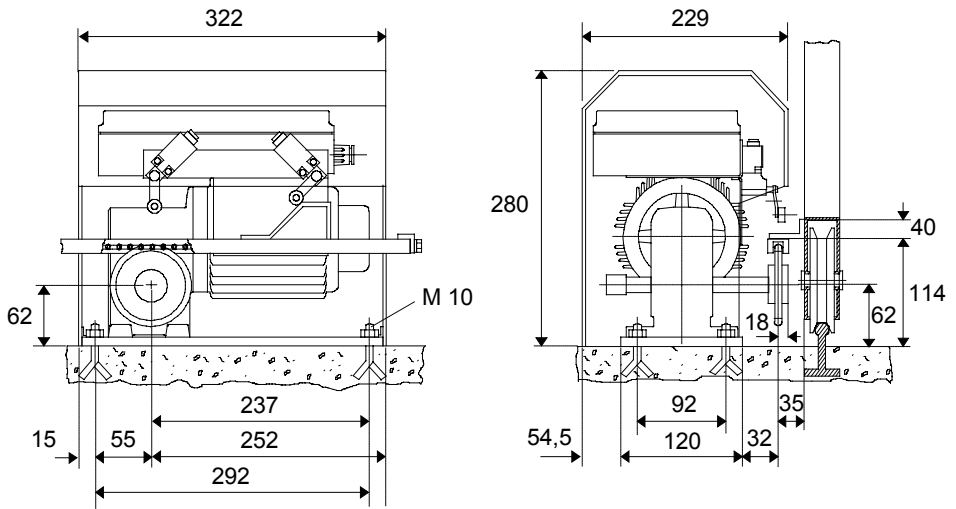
Dimensional drawing for types WS 300/1, DS 400/1 and DS 600/1 with chain guide and sprocket
